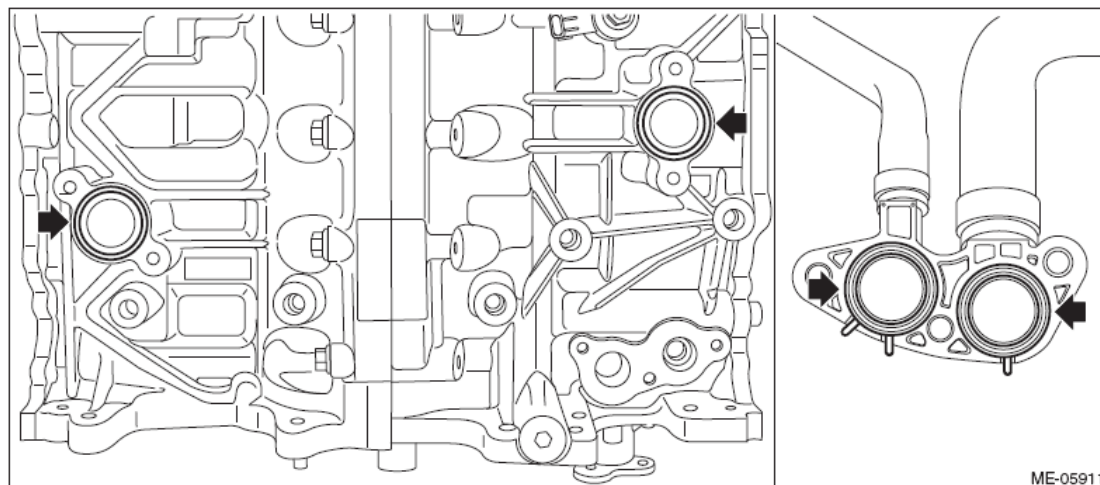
Locating Cylinder Block And PCV Connector O-ring
